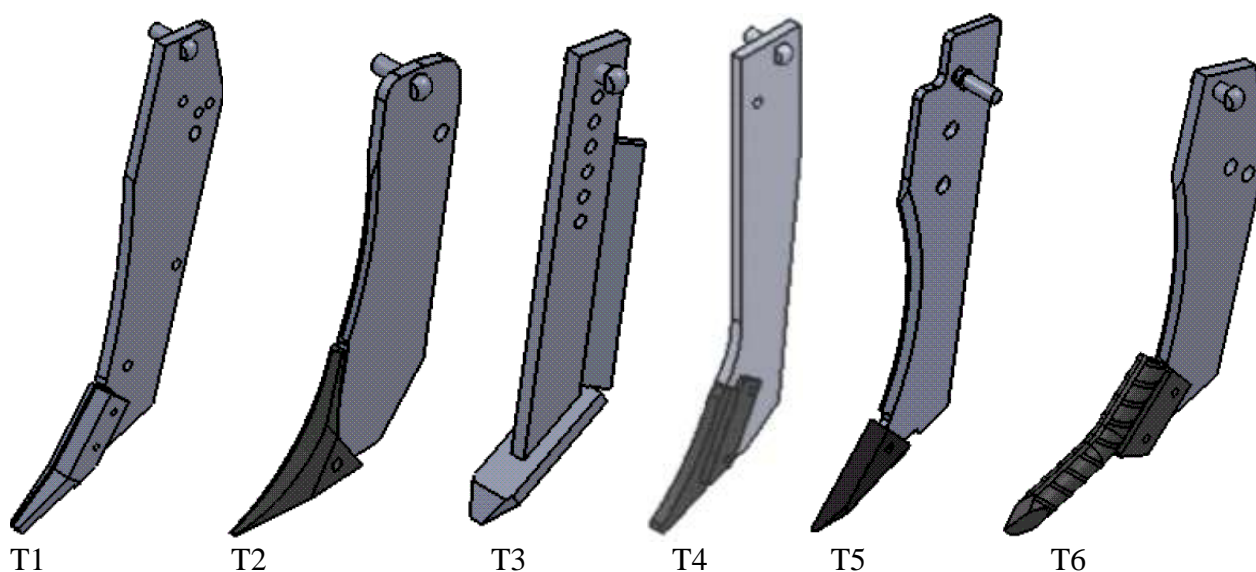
Perspective view of the hoe-type sets tested, with T1, T2, T4 and T5 being produced industrially and the others handcrafted.
